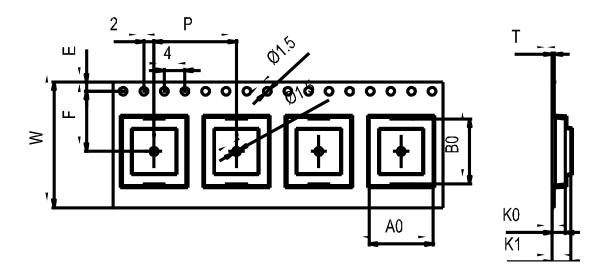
Carrier Tape Dimension Drawing (Unit: mm)
